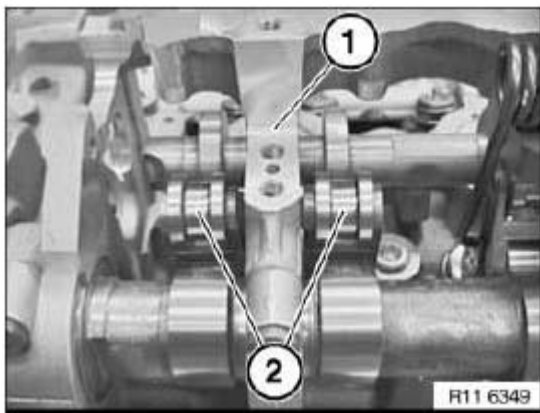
Identifying Intermediate Levers And Contact Surfaces
